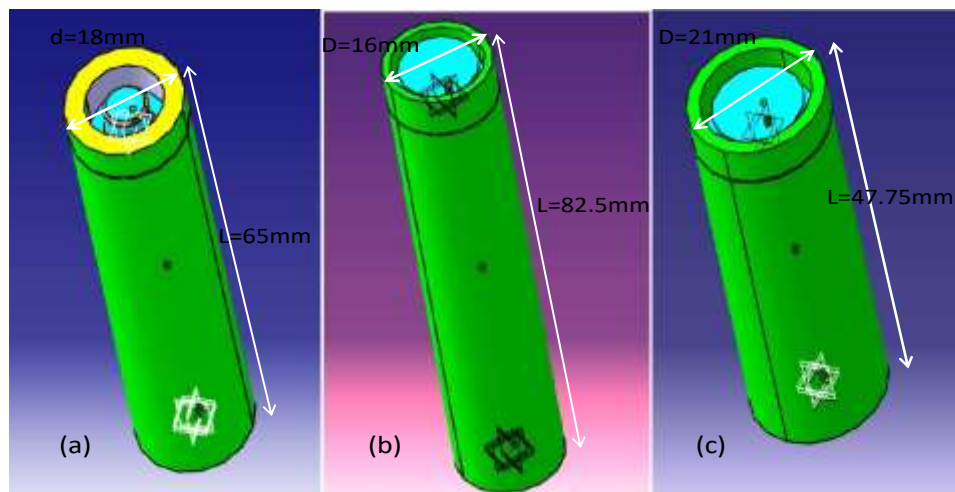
(a) Datum geometry (DG) i.e. 18650 LIB, (b) large geometry (LG) and (c) small geometry (SG).
